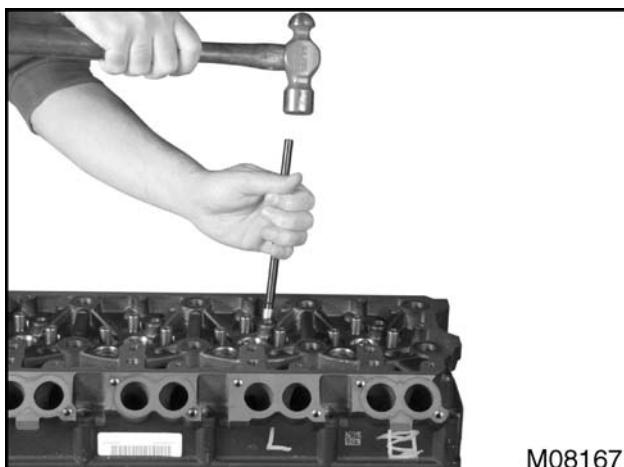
Glow Plug Sleeve Installer ZTSE4532
